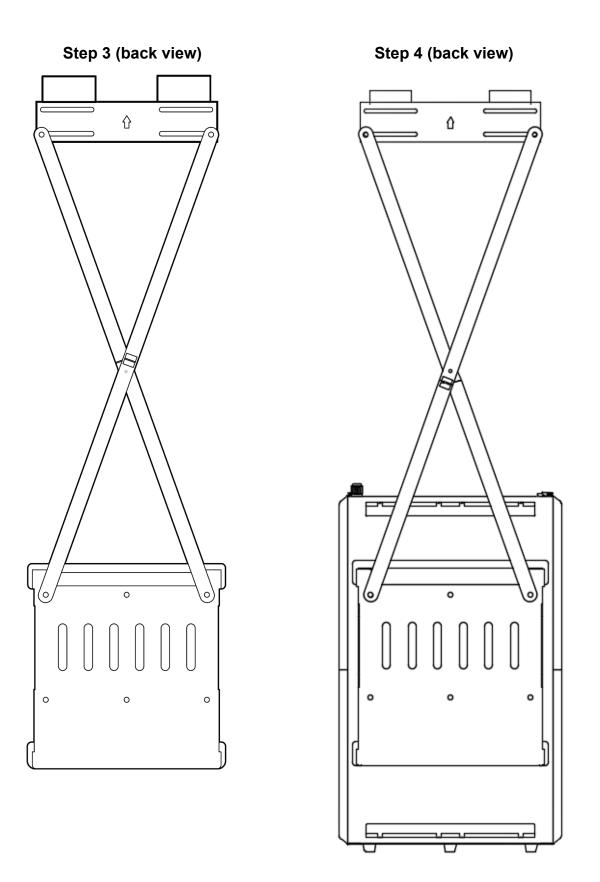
WallMount Installation with Conduit Box & 12/18kPV Steps 3 & 4
